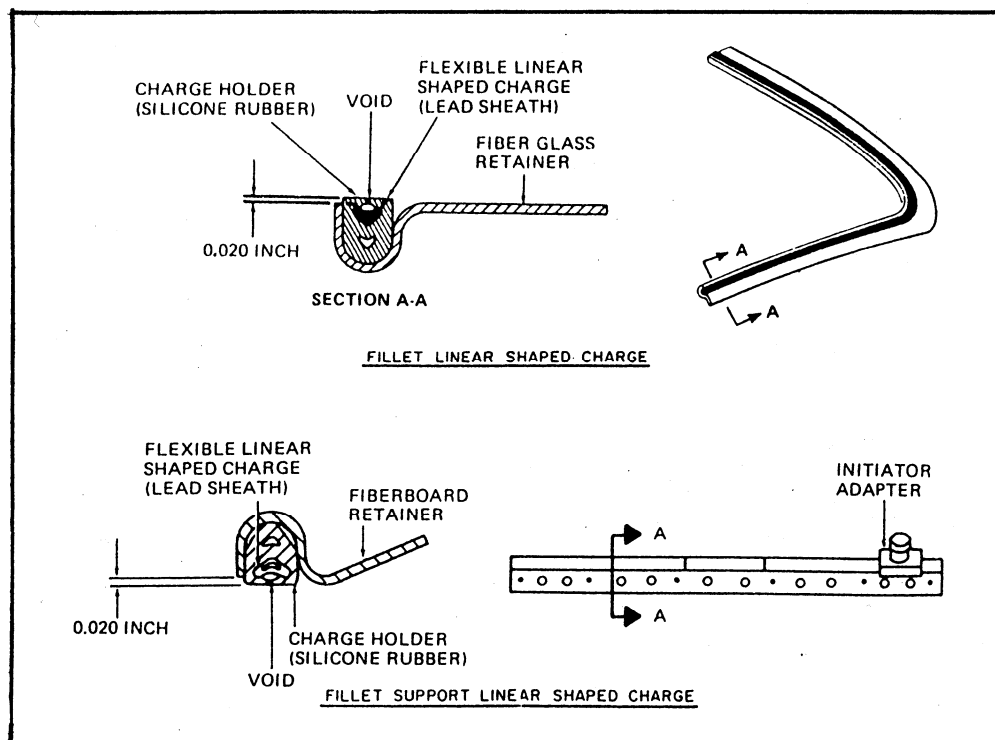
Fillet and fillet support explosive shaped charge.
